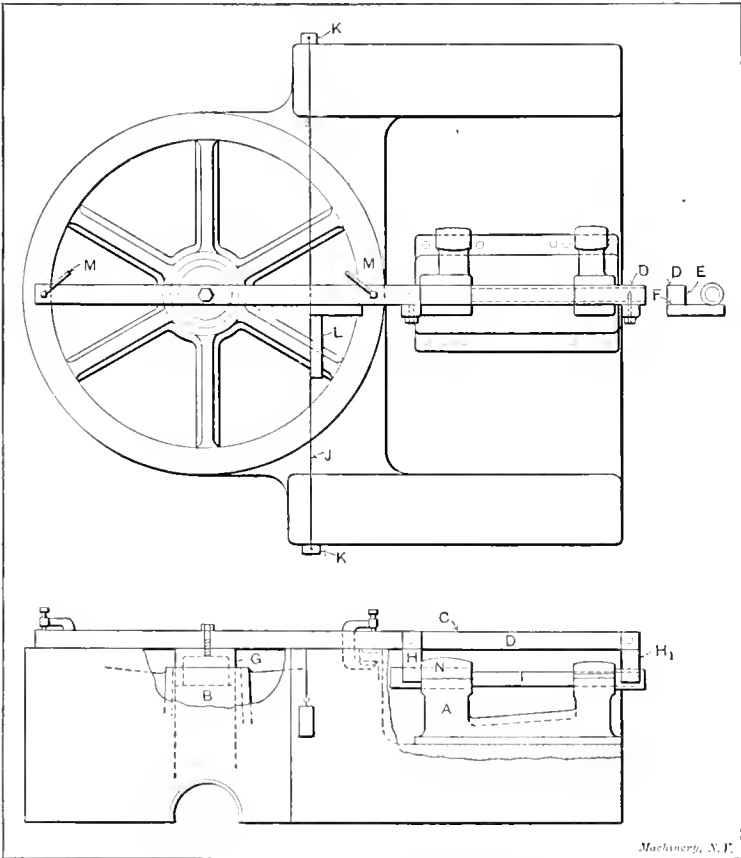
Gage for Aligning the Driving Shaft Bracket on a Vertical Boring Mill of the Bevel Gear Driven Type
